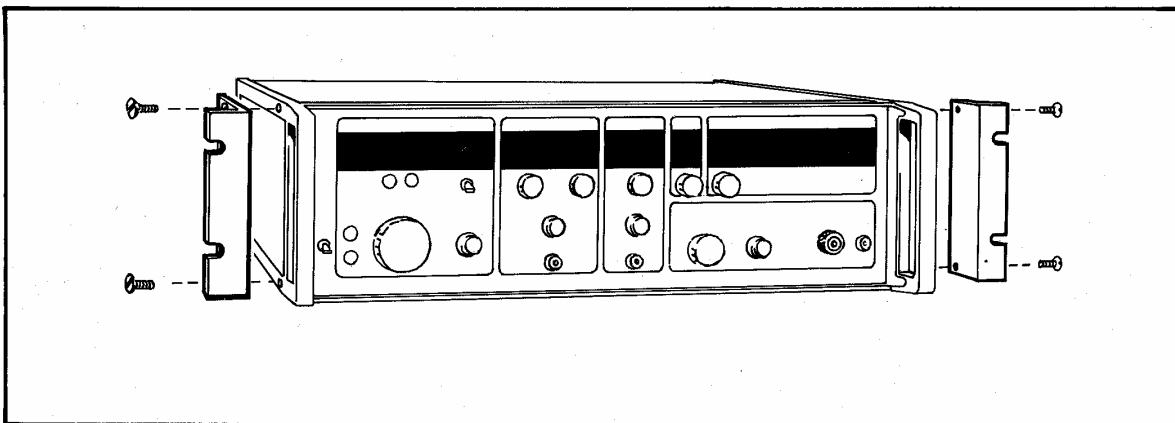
19" RACK MOUNTING OF THE 7100A
